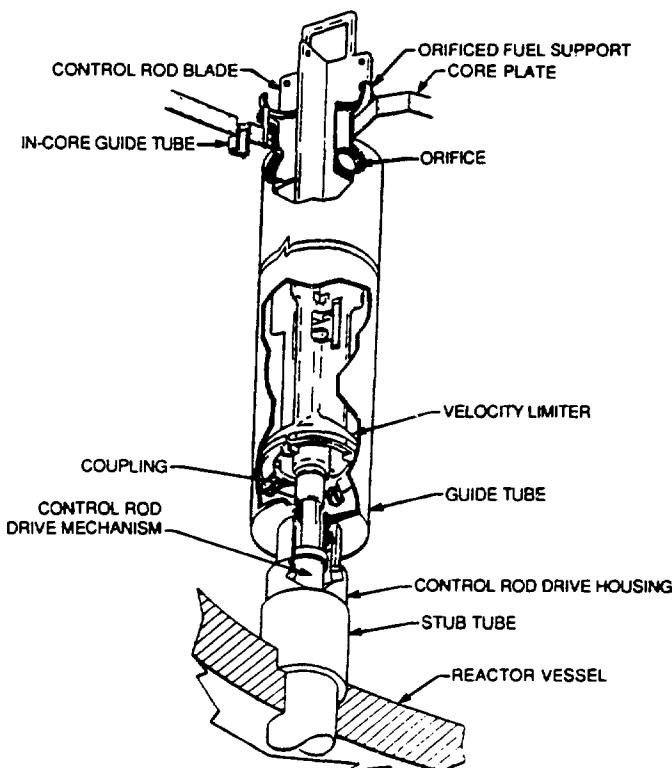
The control rod guide tubes hold the control blades when they are withdrawn from the core into the lower plenum.
